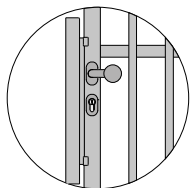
Knob - knob with plates - version for wickets with electromagnetic locks.
